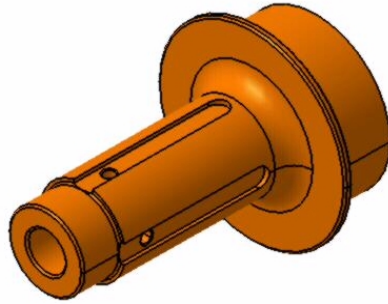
Proposed Shaft Design for In-wheel Motor
